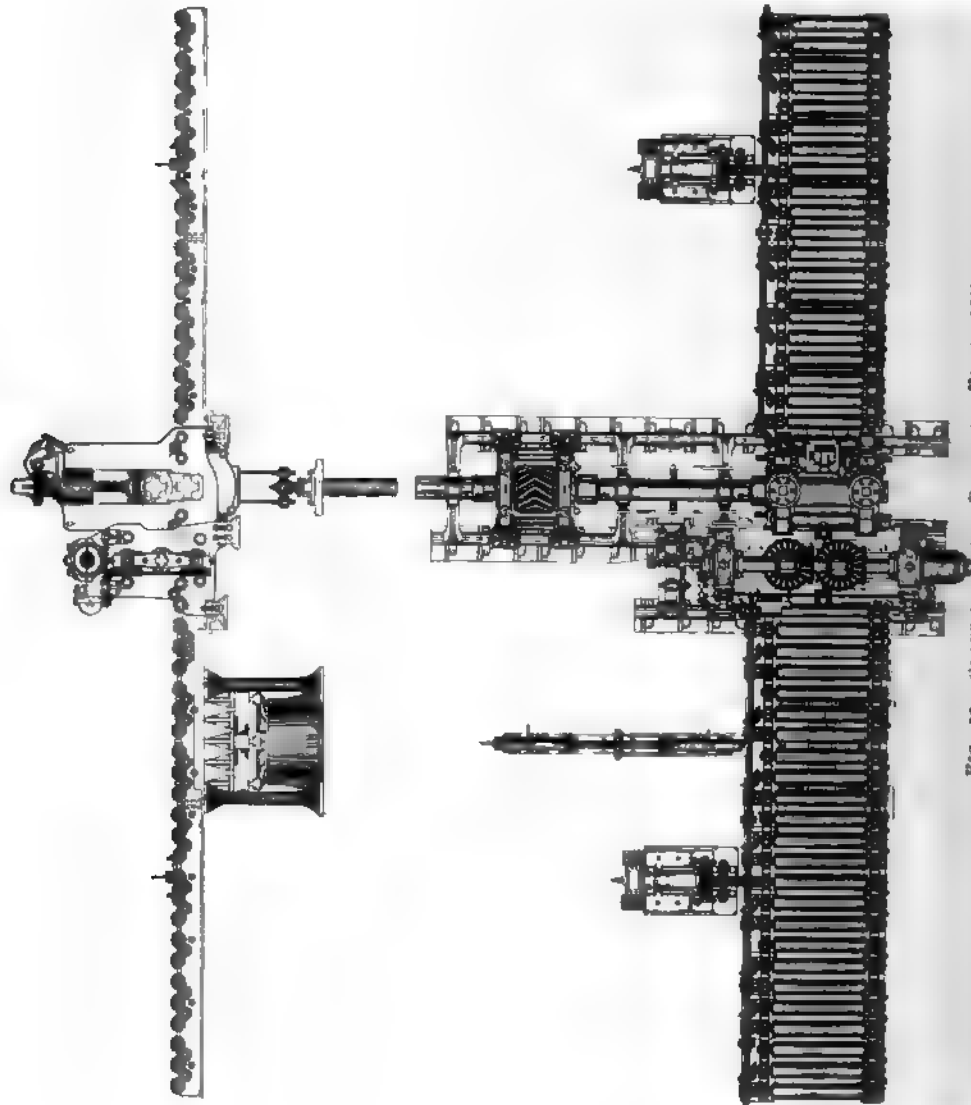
SLABBING MILL.—PLAN AND ELEVATION.
